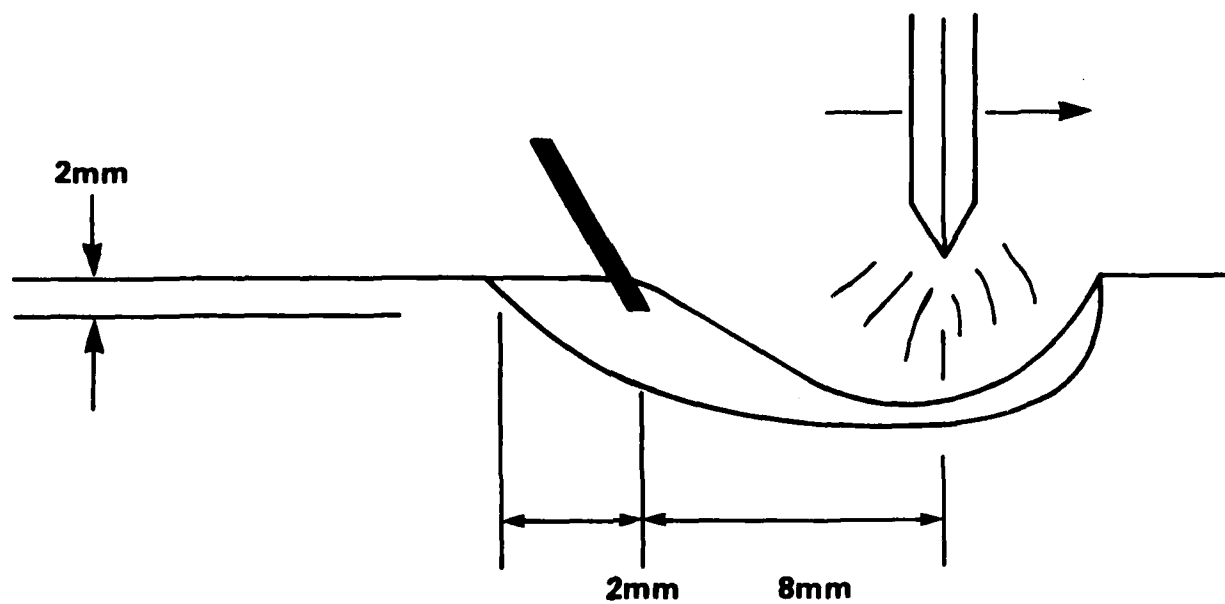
Position of Thermocouple in Weld Pool
